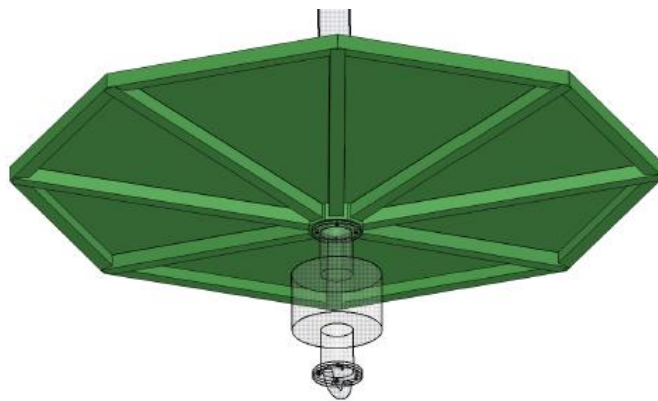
Inverted parachute made by aluminum tubular beams with a rectangular shape
